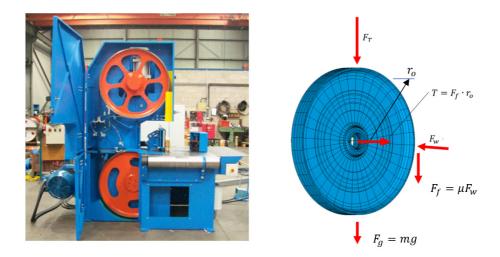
Typical bandsaw machine and loads on driven pulley wheel
